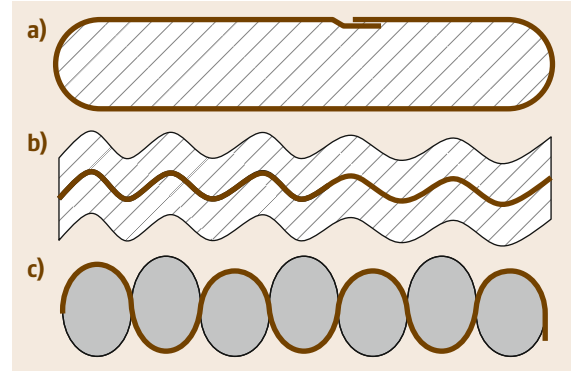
c Composite material seals: (a) metal jacketed with overlapped joint, (b) corrugated seal ring with metal core, and (c) corrugated seal ring with asbestos rope support
